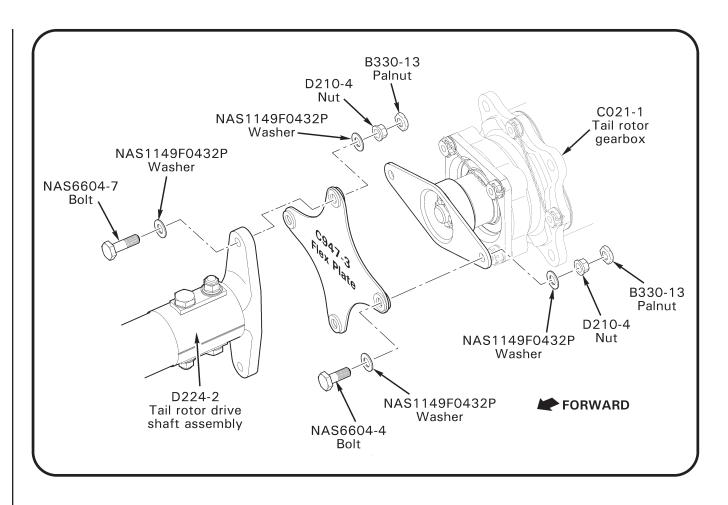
C947-3 AFT FLEX PLATE INSTALLATION
